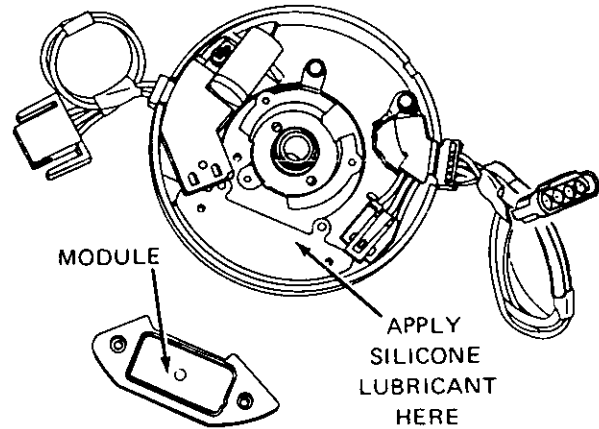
D Distributor Disassembly, Test and Reassembly (Coil in Cap) 2 of 3
